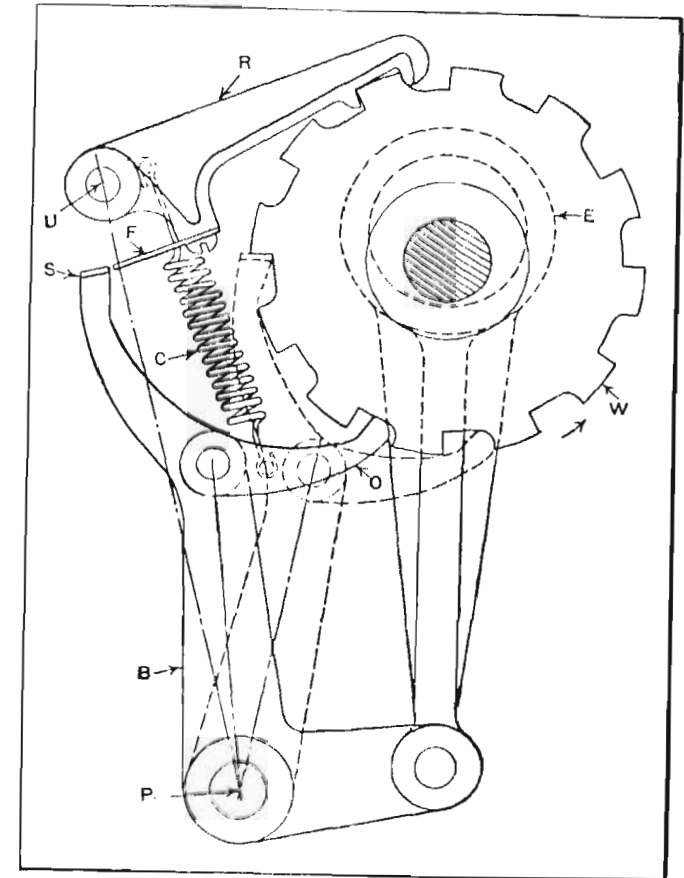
Ratchet Mechanism Designed to Move a Heavy Load Intermittently and Accurately
